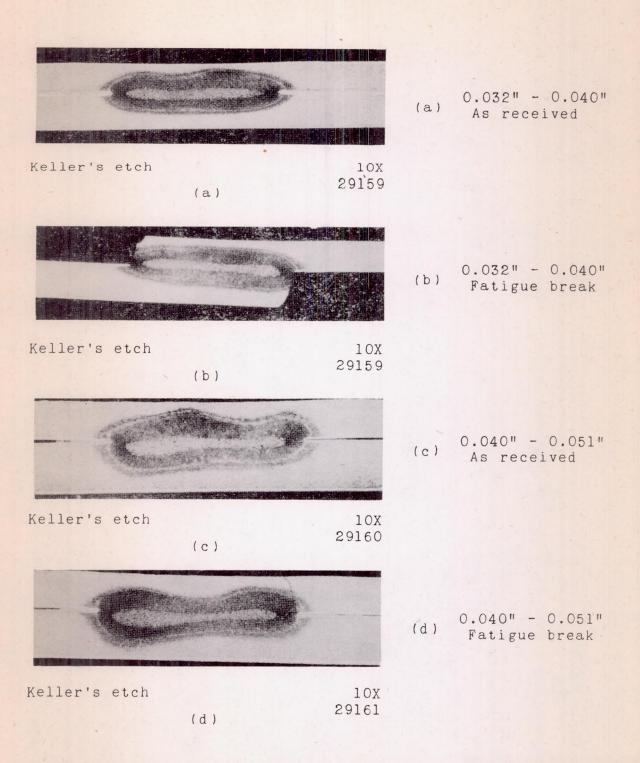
Spot welds in dissimilar gauge sheet - Company B welds.
